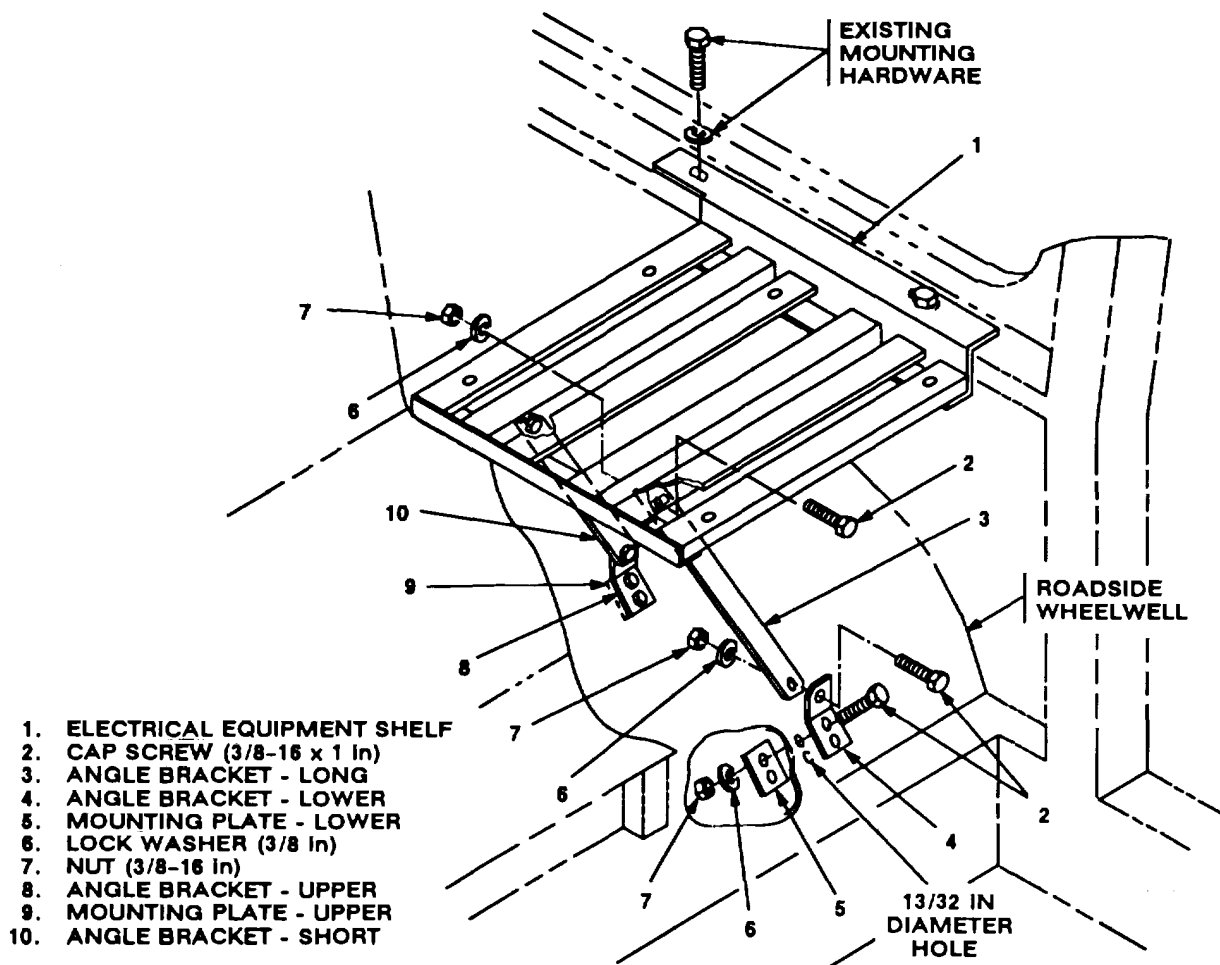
Electrical Equipment Shelf Installation: Rear Roadside
